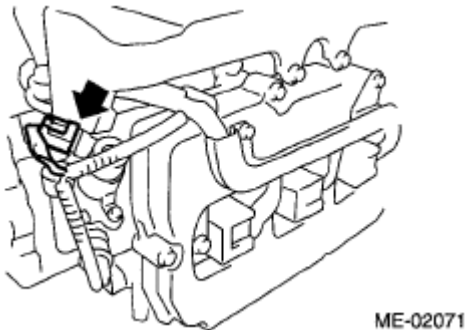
Identifying Connector To Oil Switching Solenoid Valve
